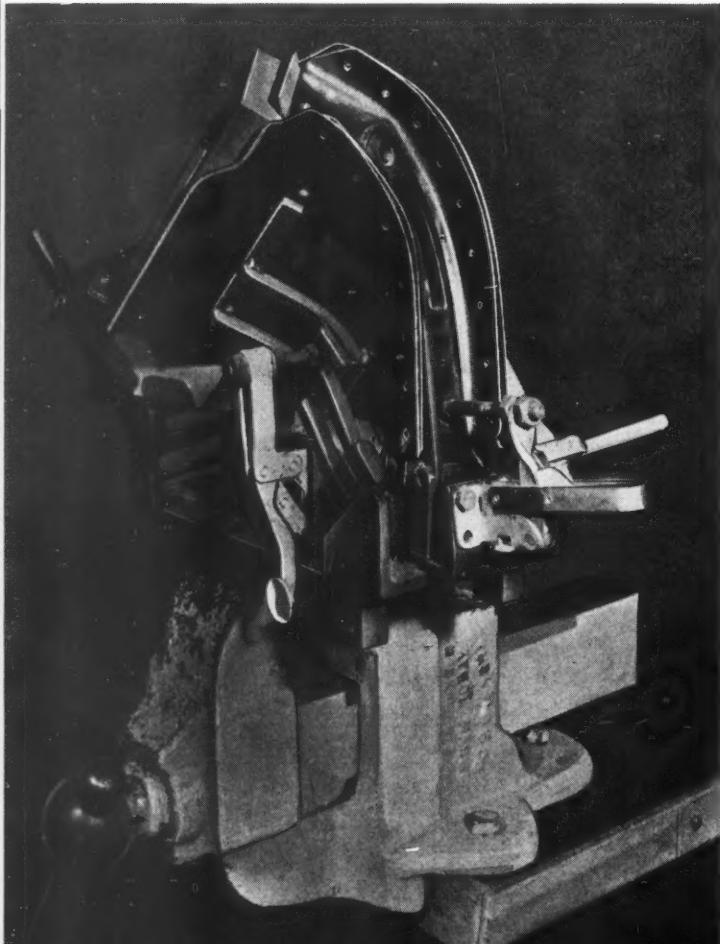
Fixtures for drilling fabricated laminated plastic parts insure the alignment of holes in assembling mating pieces.
